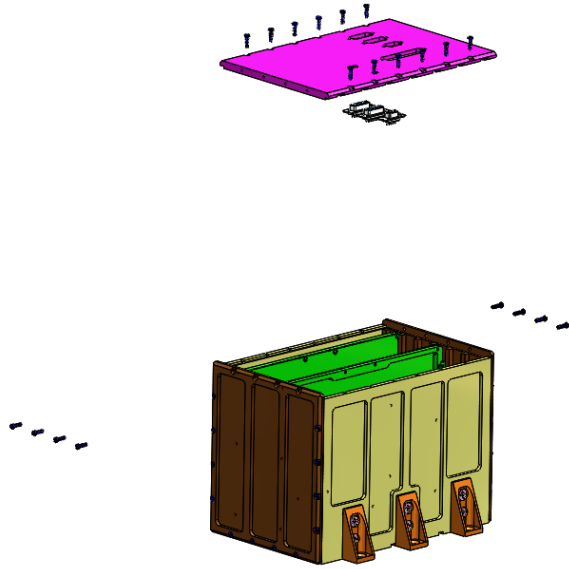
B. Assembly of Heat Frames (Green, and Top Plate (Purple)
